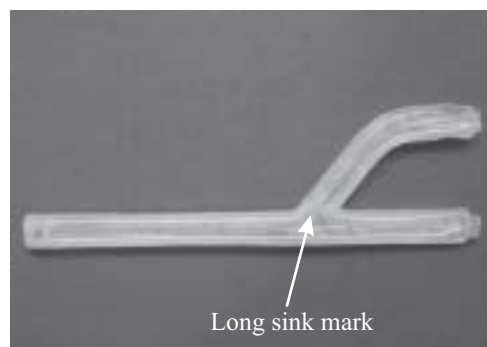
A defect in form of sink mark along the surface of the hollowed cored part caused by high mold temperature 70 °C
